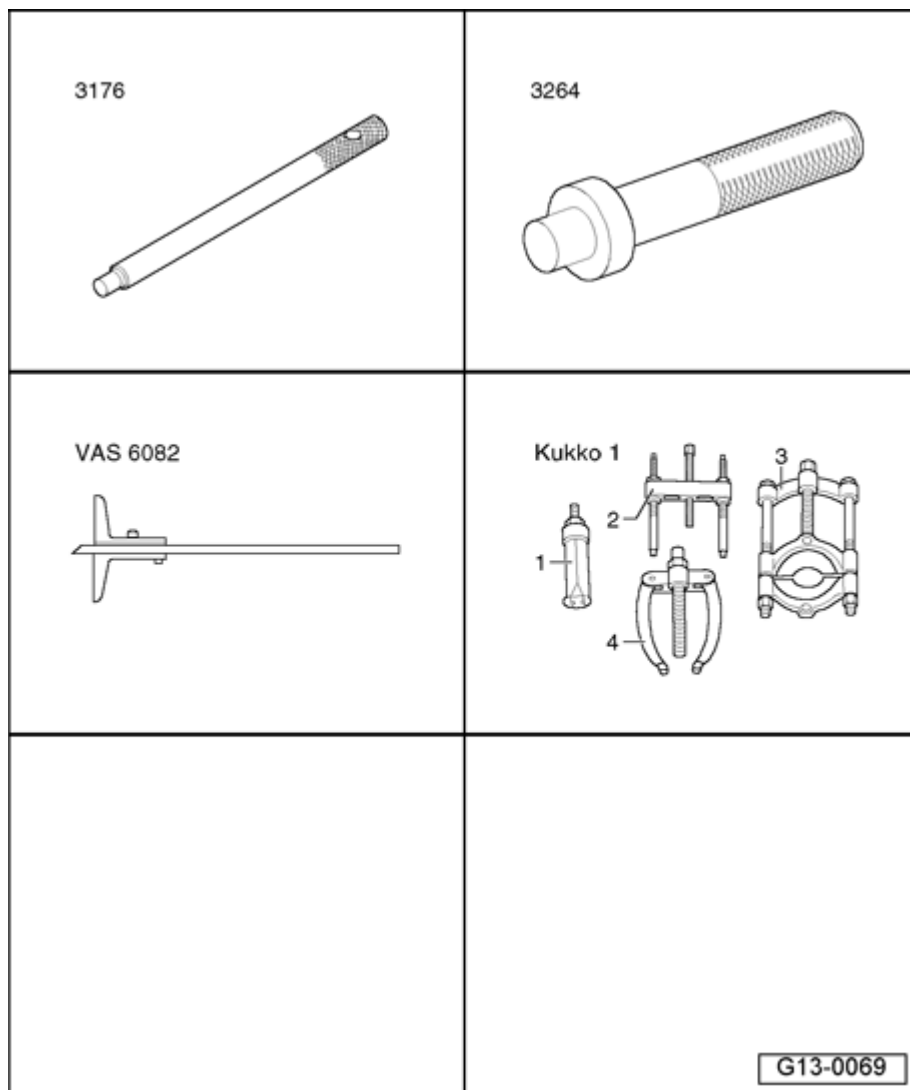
Identifying Special Tools - Needle Bearing On Dual Mass Flywheel, Pulling Out And Driving In
